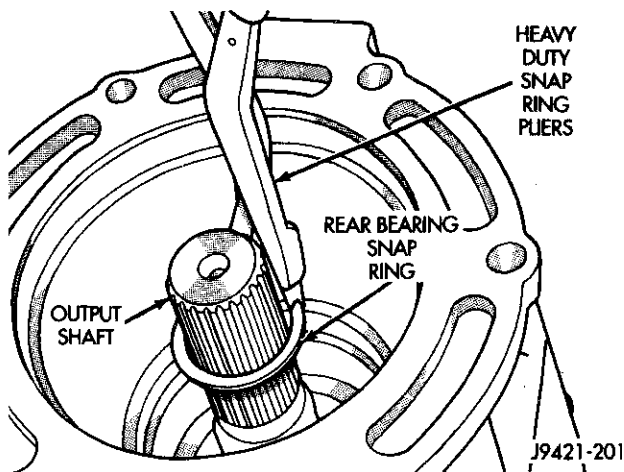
Installing Rear Bearing Snap Ring—4WD
